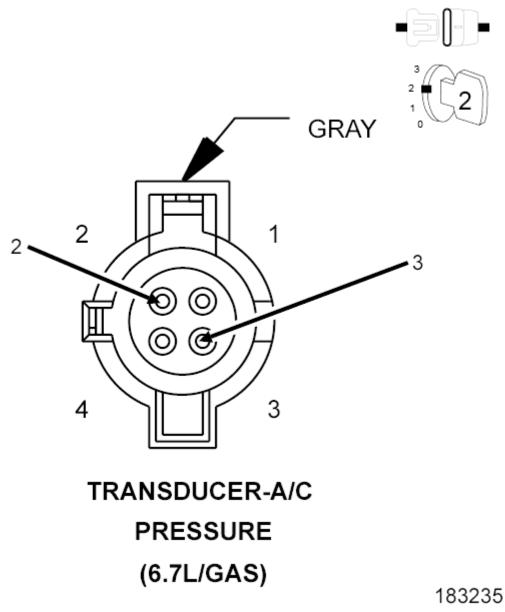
Checking ECM Sets A/C Pressure Sensor DTC Courtesy of CHRYSLER GROUP, LLC
